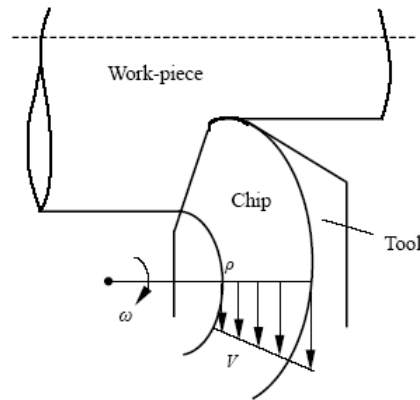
Mechanism of Chip Side-Curl (Zhou 2001-b)
